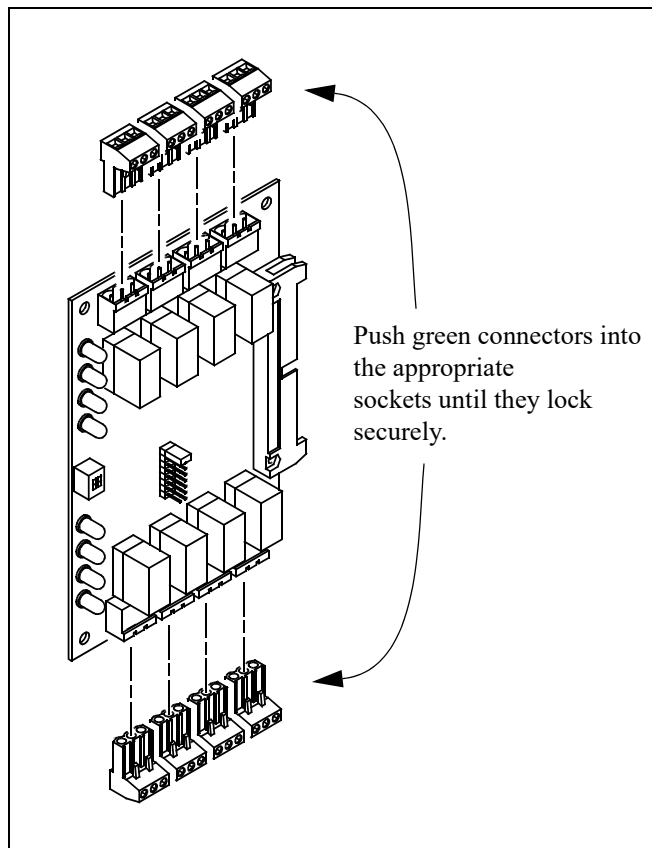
Plugging in Terminal Blocks on an Expansion Board
